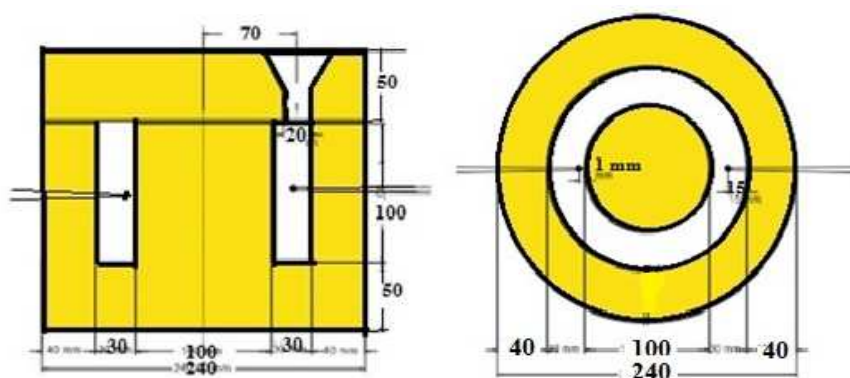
Casting - mould assembly used in the experiment (tubular cylindrical casting, Dext = 160 mm)
